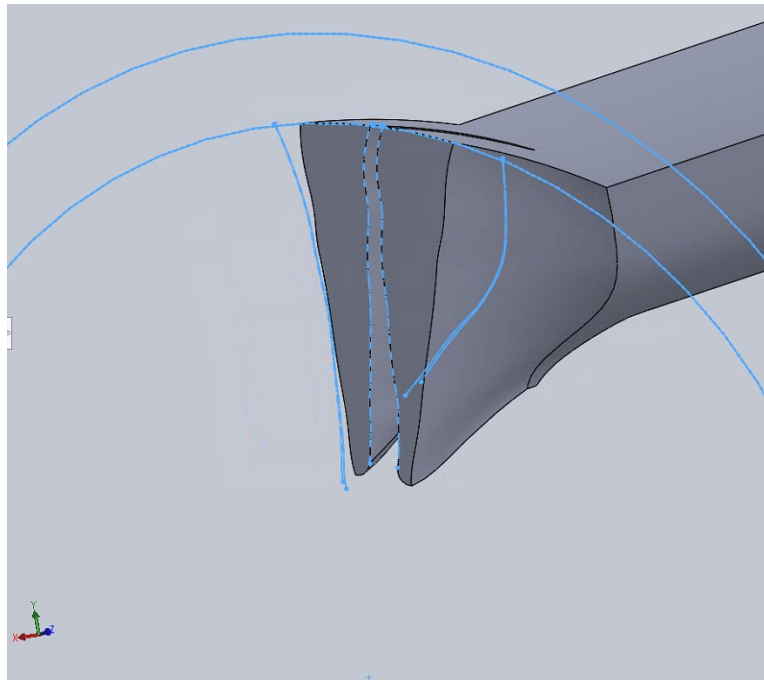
Technique used to construct tip-gaps of desired dimensions.
